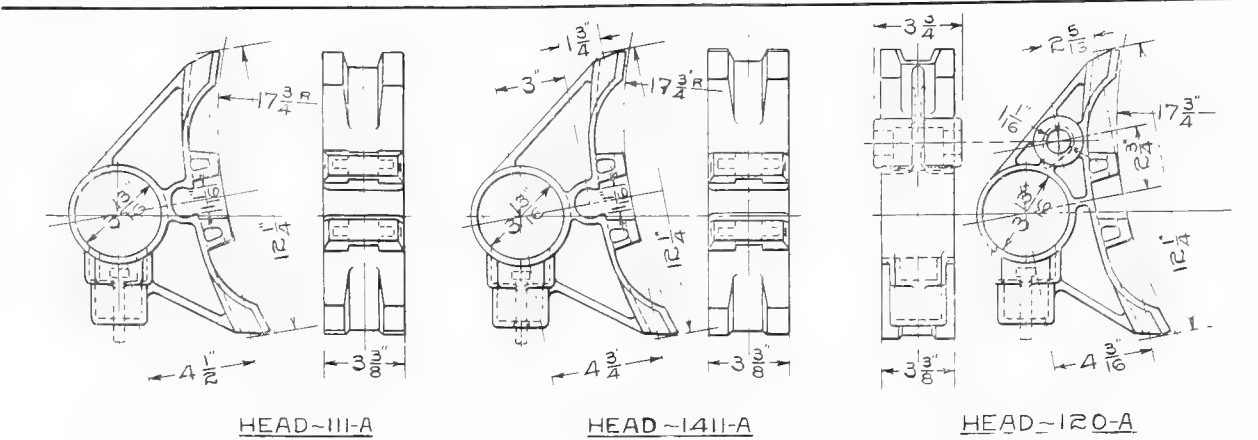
Semi-Adjustable Head for Creco Brake Beam. Chicago Railway Equipment Company.
